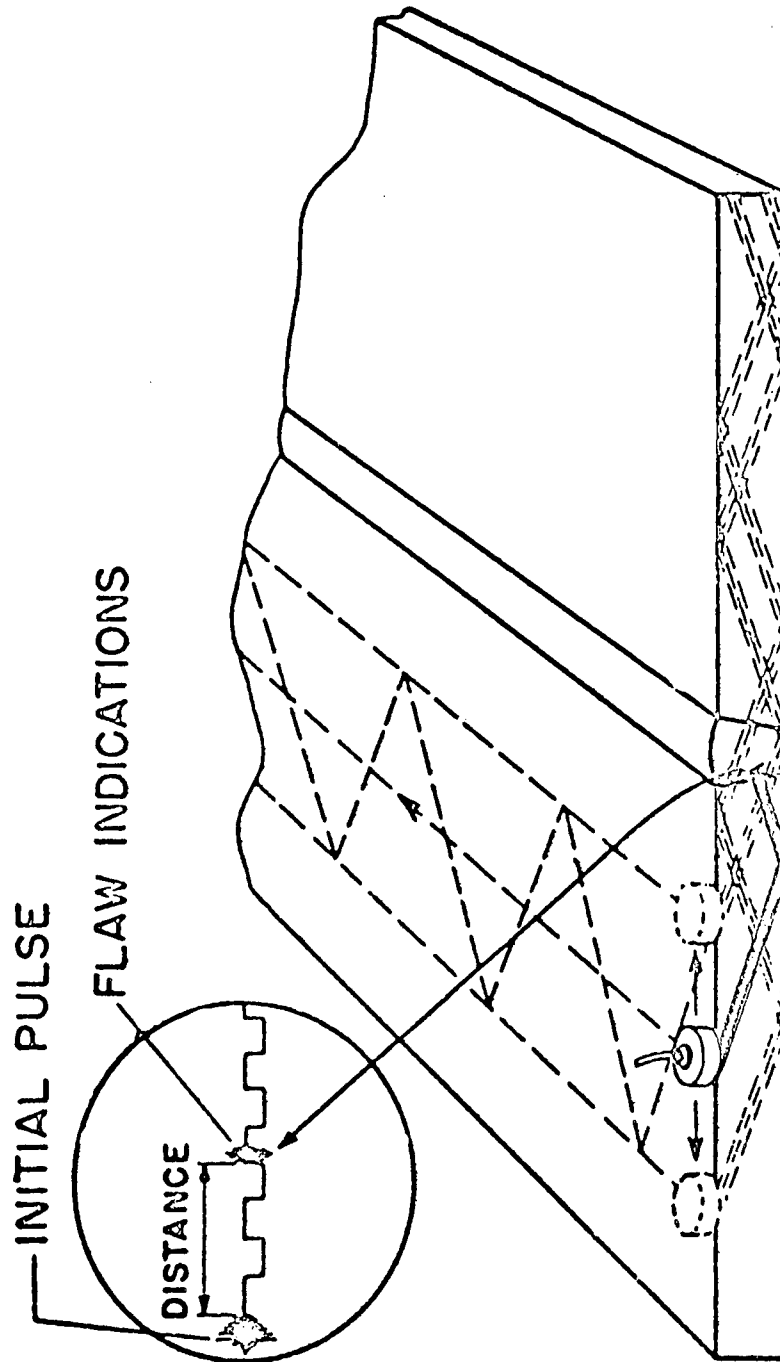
Ultrasonic Testing of a Weld with the Ultrasonic Angle Beam or Shear Wave Technique
